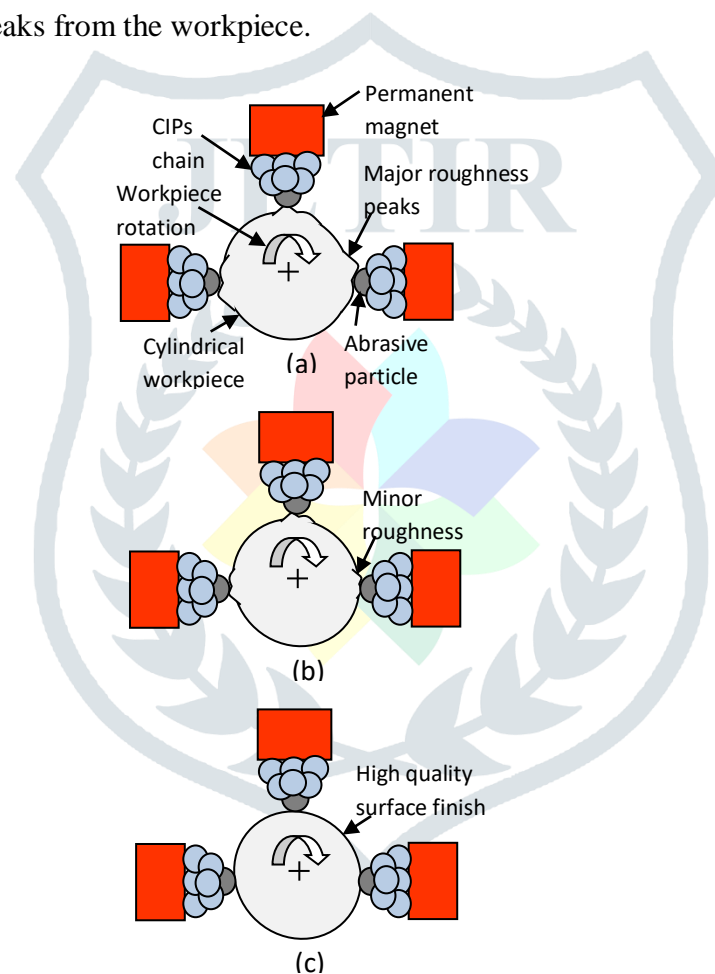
Different stages of material removal mechanism during finishing of cylindrical copper workpiece.
